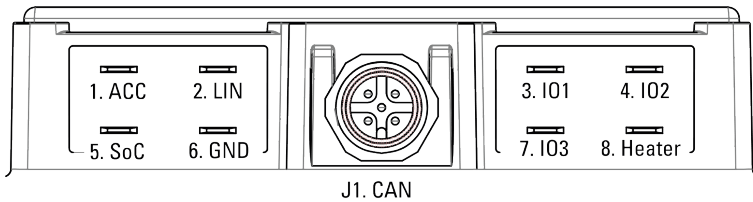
FASTON Connections. Note: FASTON connections are also shown on the inside of the protective lid.
